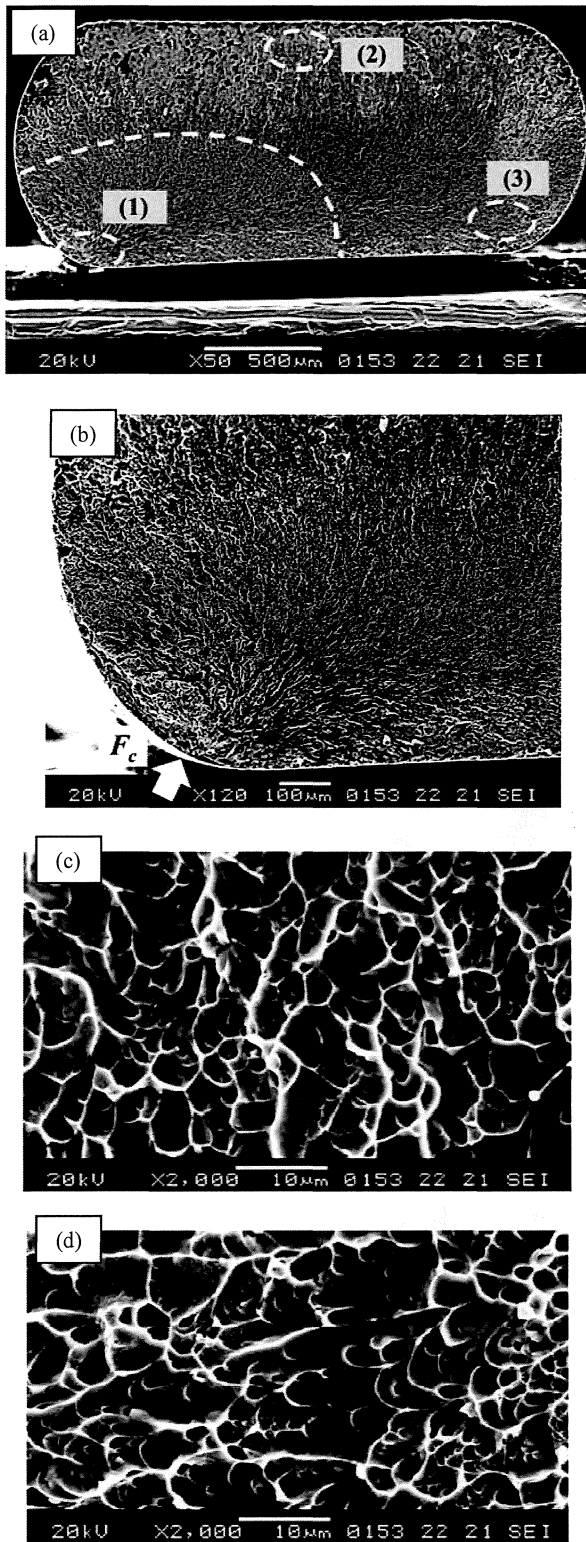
SEM photographs of fracture surface of USP tape with $d = 0.8$ mm and $c = 4000\%$ for $\epsilon_a = 1.64\%$ and $N_f = 6788$: (a) whole fracture surface, (b) crack initiation part (1), (c) middle part of unstable fracture (2), and (d) final unstable fracture part (3).
